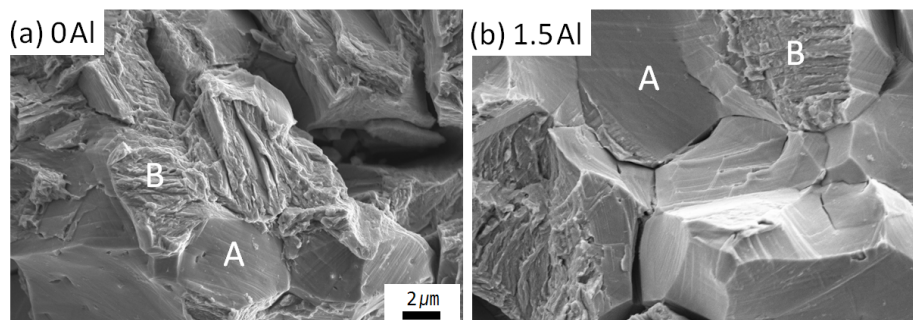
Fracture surface in the brittle fractured layer showing both intergranular (A) and transgranular (B) fractures in samples charged with 1 A m^{-2}
